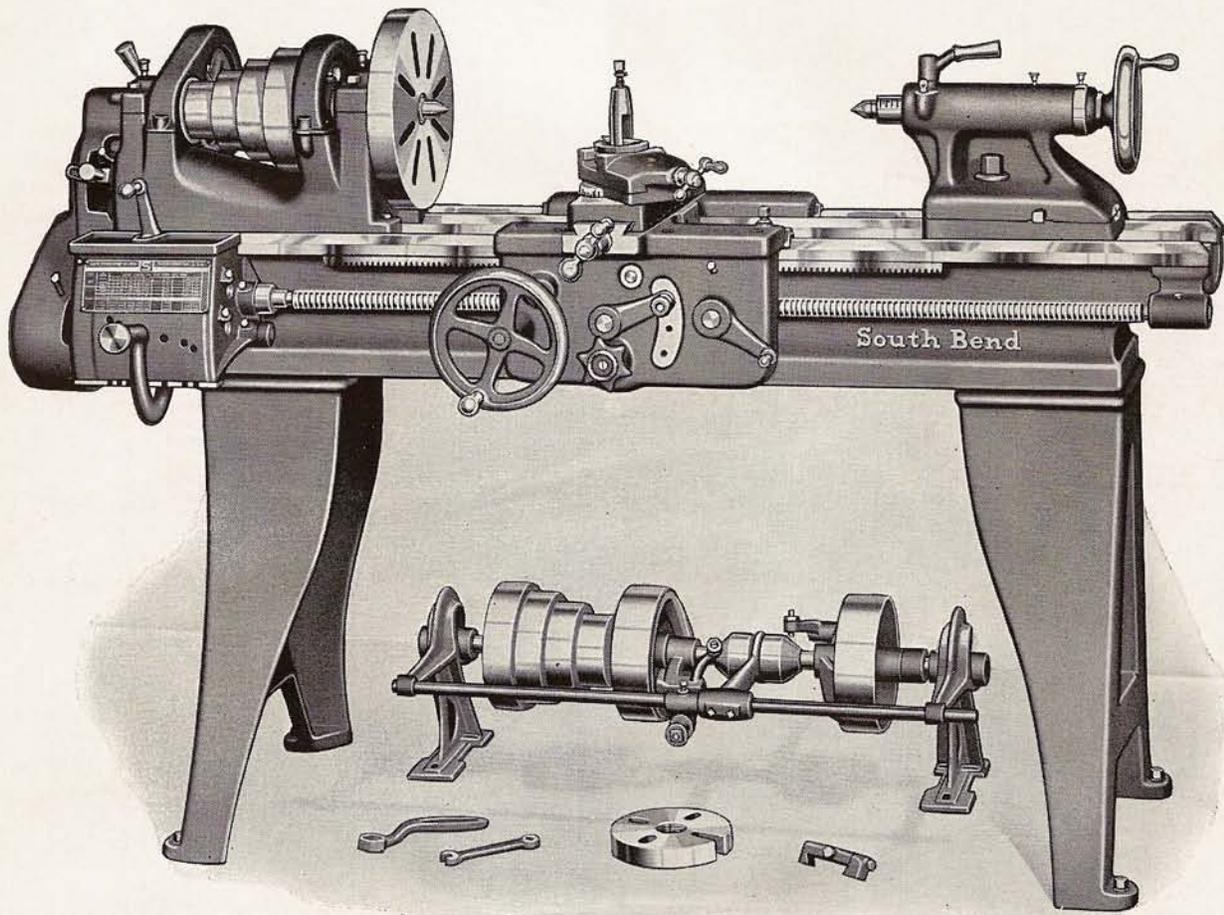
Cat. No. 13-B, 13" x 5' Series "R" Quick Change Gear Countershaft Drive Lathe complete as shown...\$523.00
